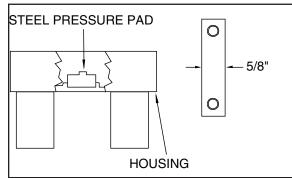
Housing and Pressure Pad for 5/8" Wide leaf spring.
